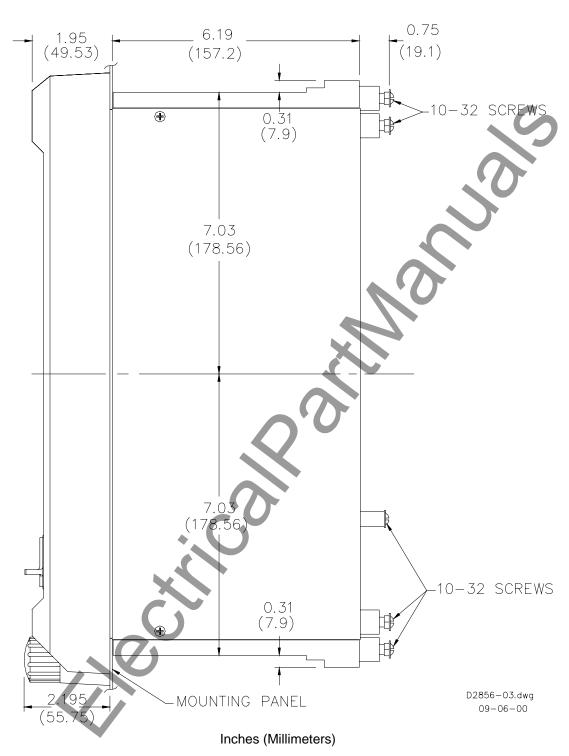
Outline Dimensions, Side View (Semi-Flush Mounting)
